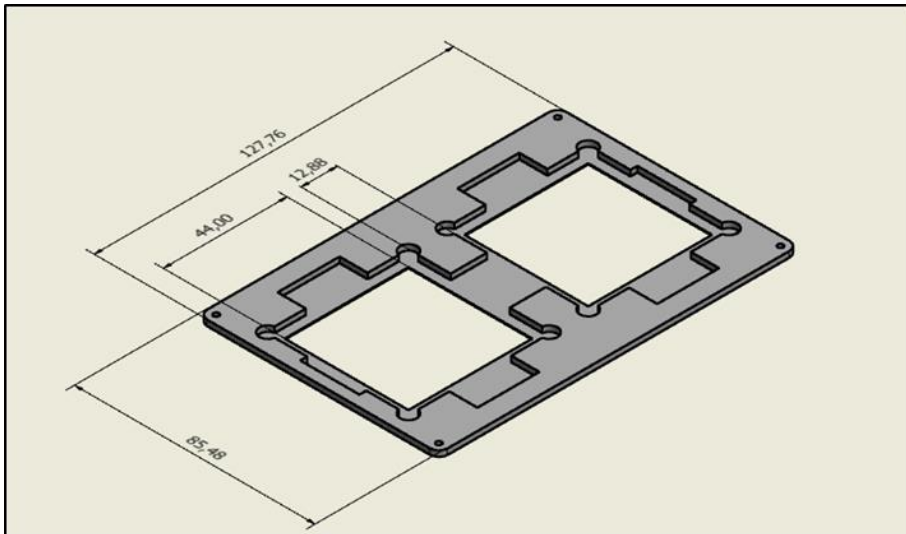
Custom microscope holder sized to standard microtiter plate dimensions.
